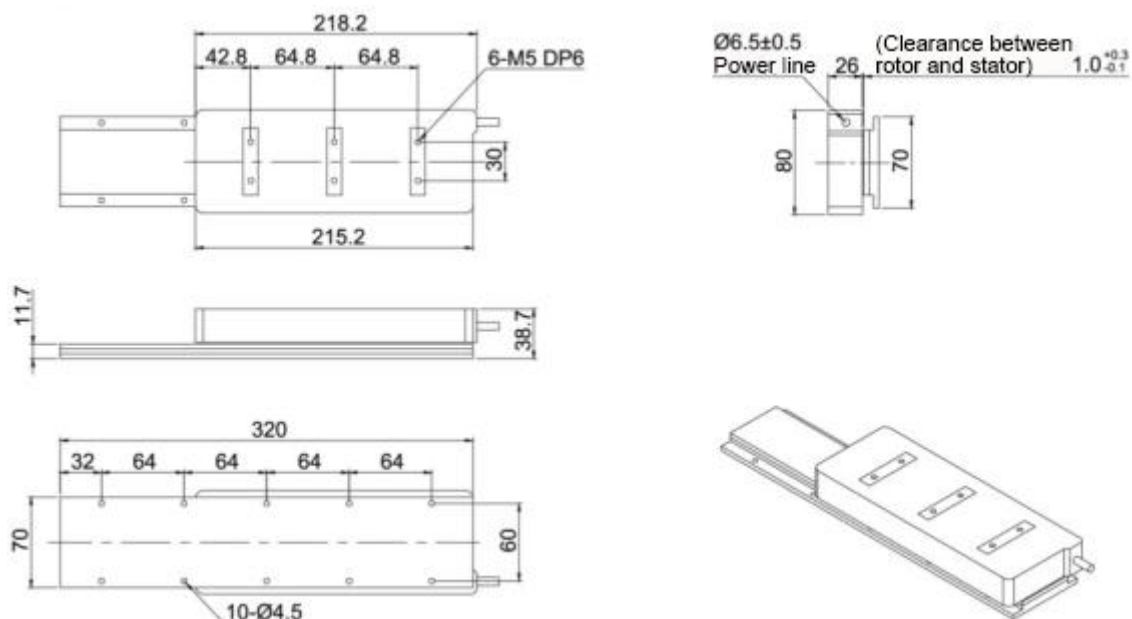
Dimensional drawing of WZCR-AZ70C3-□ motor
